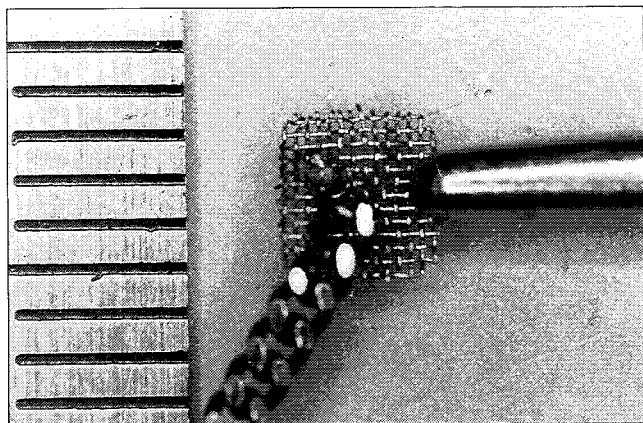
A 3cm long ligature welded to a corner of the mesh pad.
